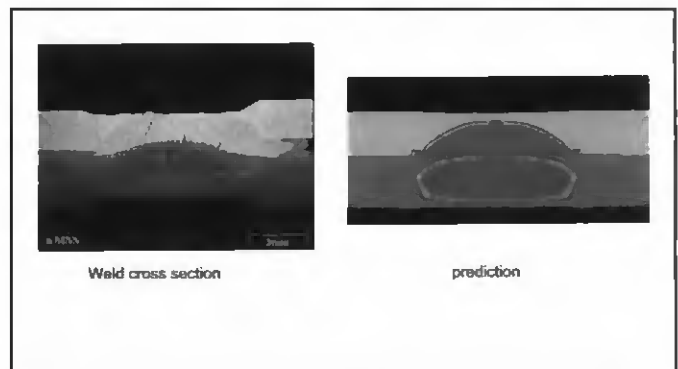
Weld structure at the end of the second welding pulse.
